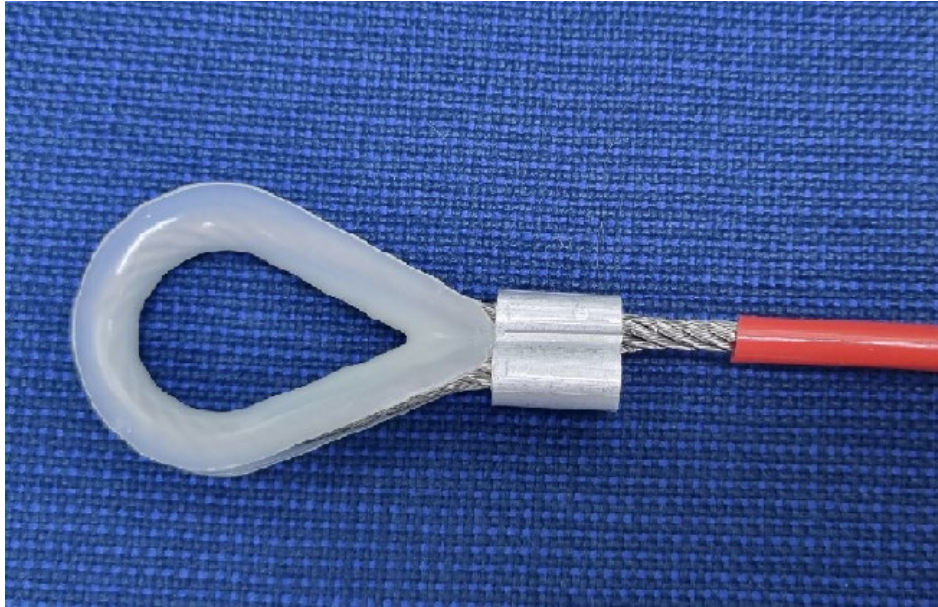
ALUMINIUM CRIMP SHOWN. NOTE THE FIGURE OF 8 SHAPE.
